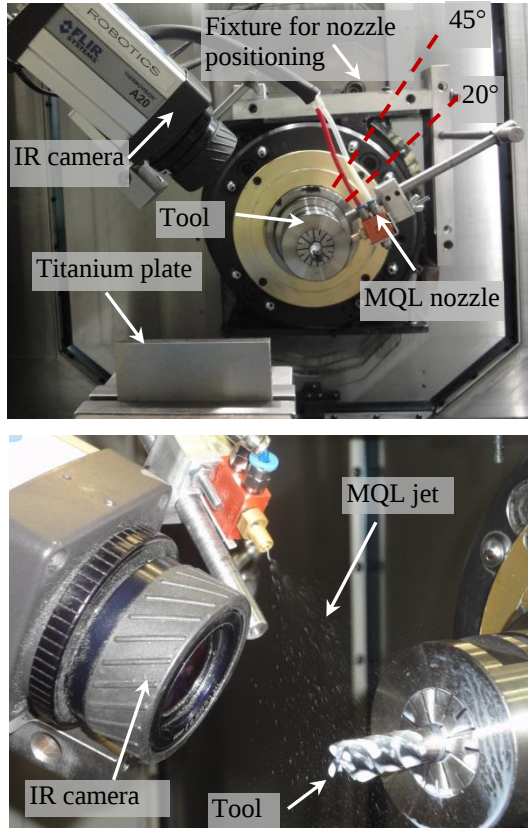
(a) Machining setup and (b) close up on the MQL jet
